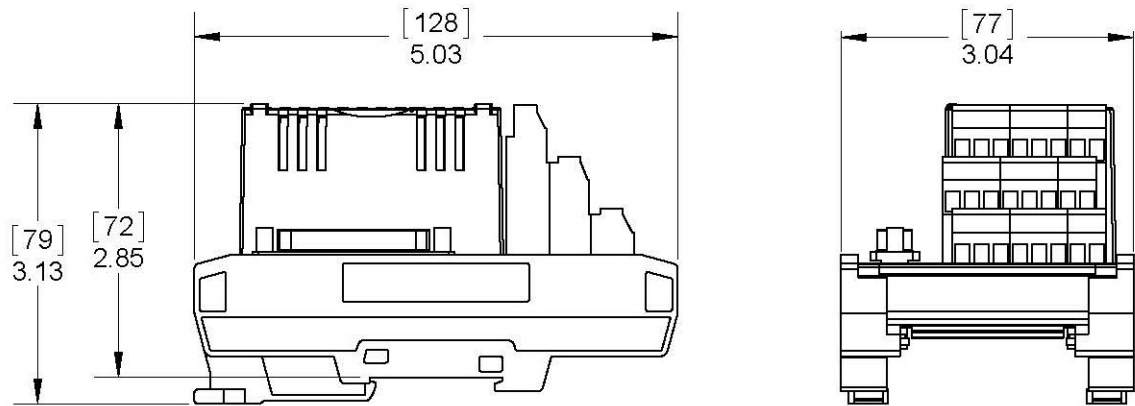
Baseplate Mounted Termination Assemblies (RH100KR)
